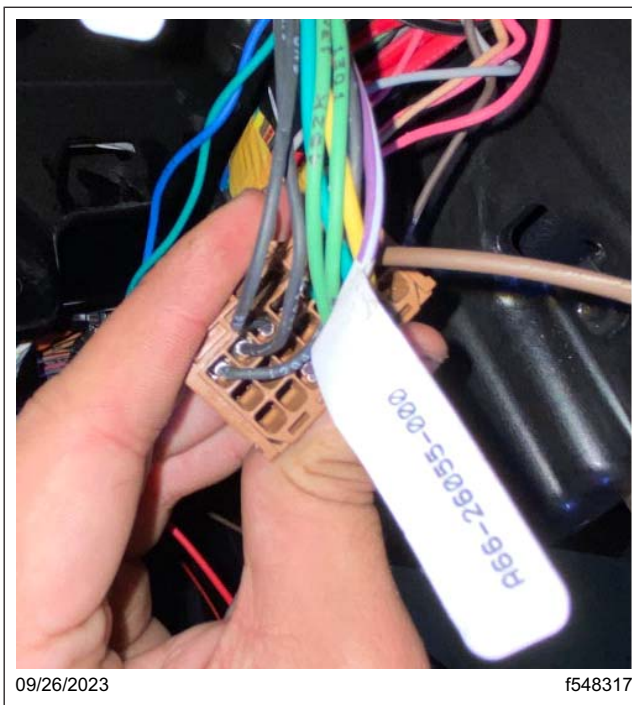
, Engaging the Lock on the XMC2 X3 Connector
